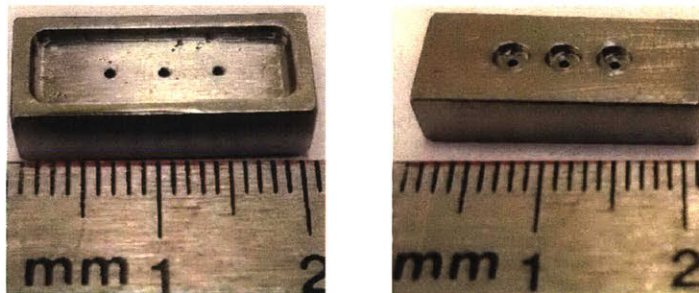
Steel housing from original design by Gonçalves da Silva (2016) with three holes. Only two are used for this modified design. Left: specimen-facing side (front) of housing where membrane fits into recess. Right: outside-facing side (back) of housing where O-ring seals fit in recesses.
